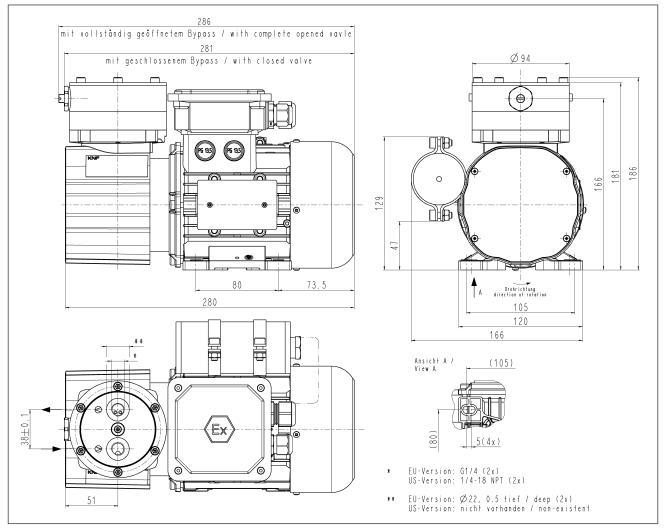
Mounting dimensions of N922FT.29E EX (capacitor motor)
